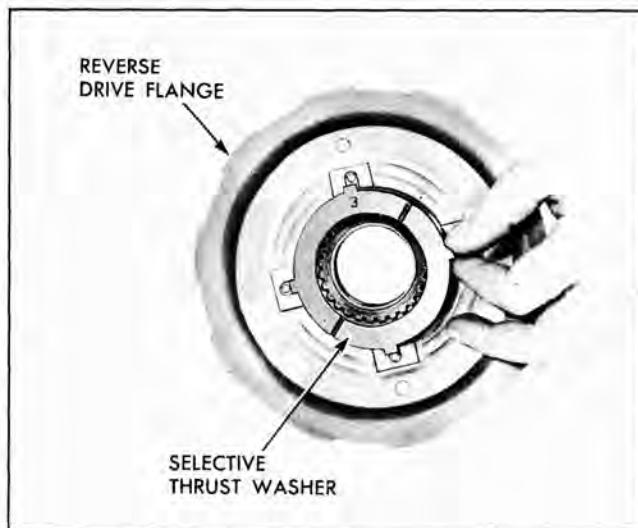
Locating Selective Washer in Reverse Drive Flange
